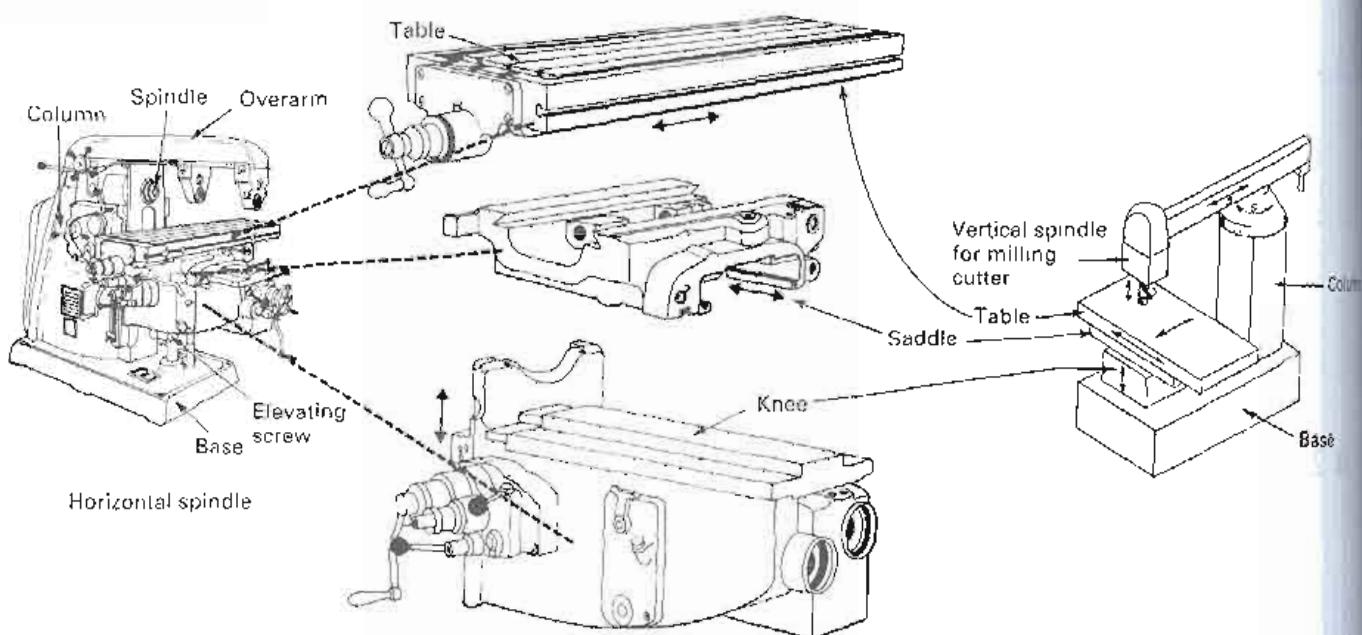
Major components of a plain column-and-knee-type milling machine, which can have horizontal spindle shown on the left, or a turret type machine with a vertical spindle, shown on the right. The workpiece and workholder on the table can be translated in X, Y, and Z directions with respect to the tool.
